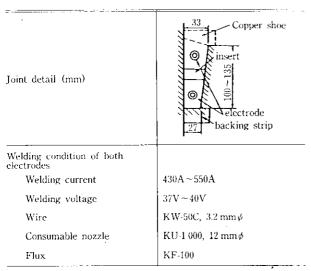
Joint using two consumable nozzles electroslag (CES) welding
